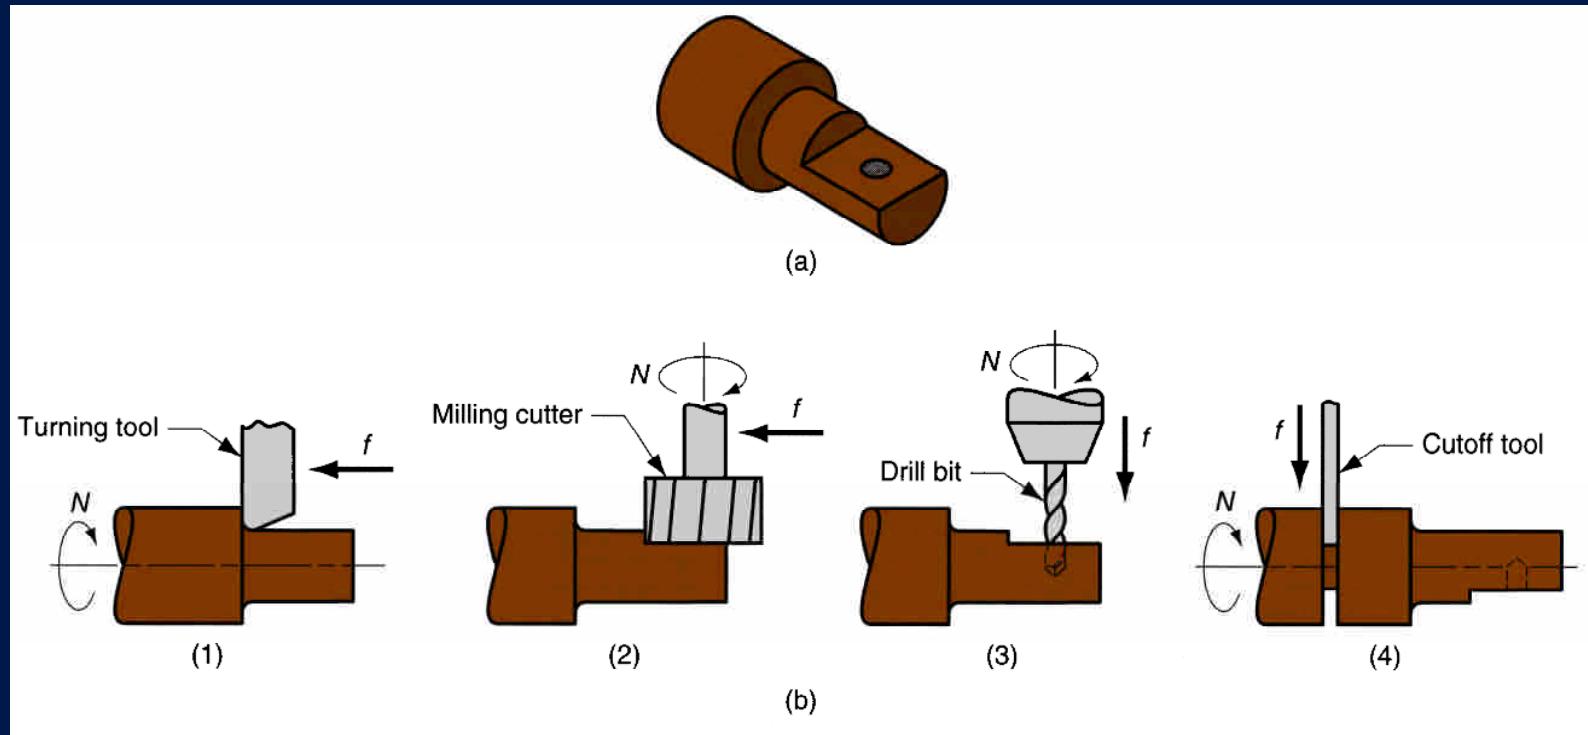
Operation of a mill-turn center: (a) example part with turned, milled, and drilled surfaces; and (b) sequence of operations on a mill-turn center: (1) turn second diameter, (2) mill flat with part in programmed angular position, (3) drill hole with part in same programmed position, and (4) cutoff
